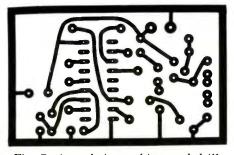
Actual-size etching-and-drilling guide for transmitter pc board.
